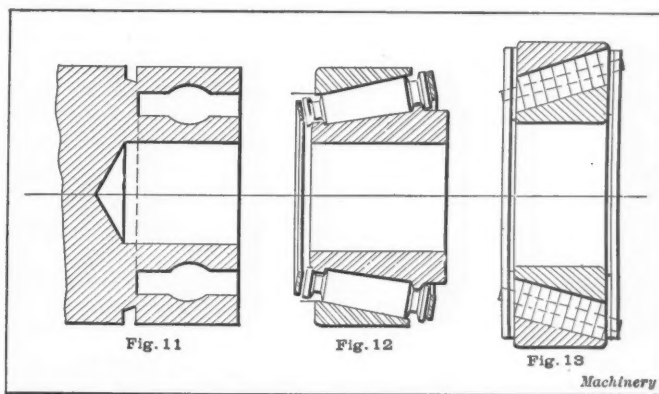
Method of Turning Ball Races from Bar Stock. Figs. 12 and 13. Taper Roller Journal and Thrust Bearings
